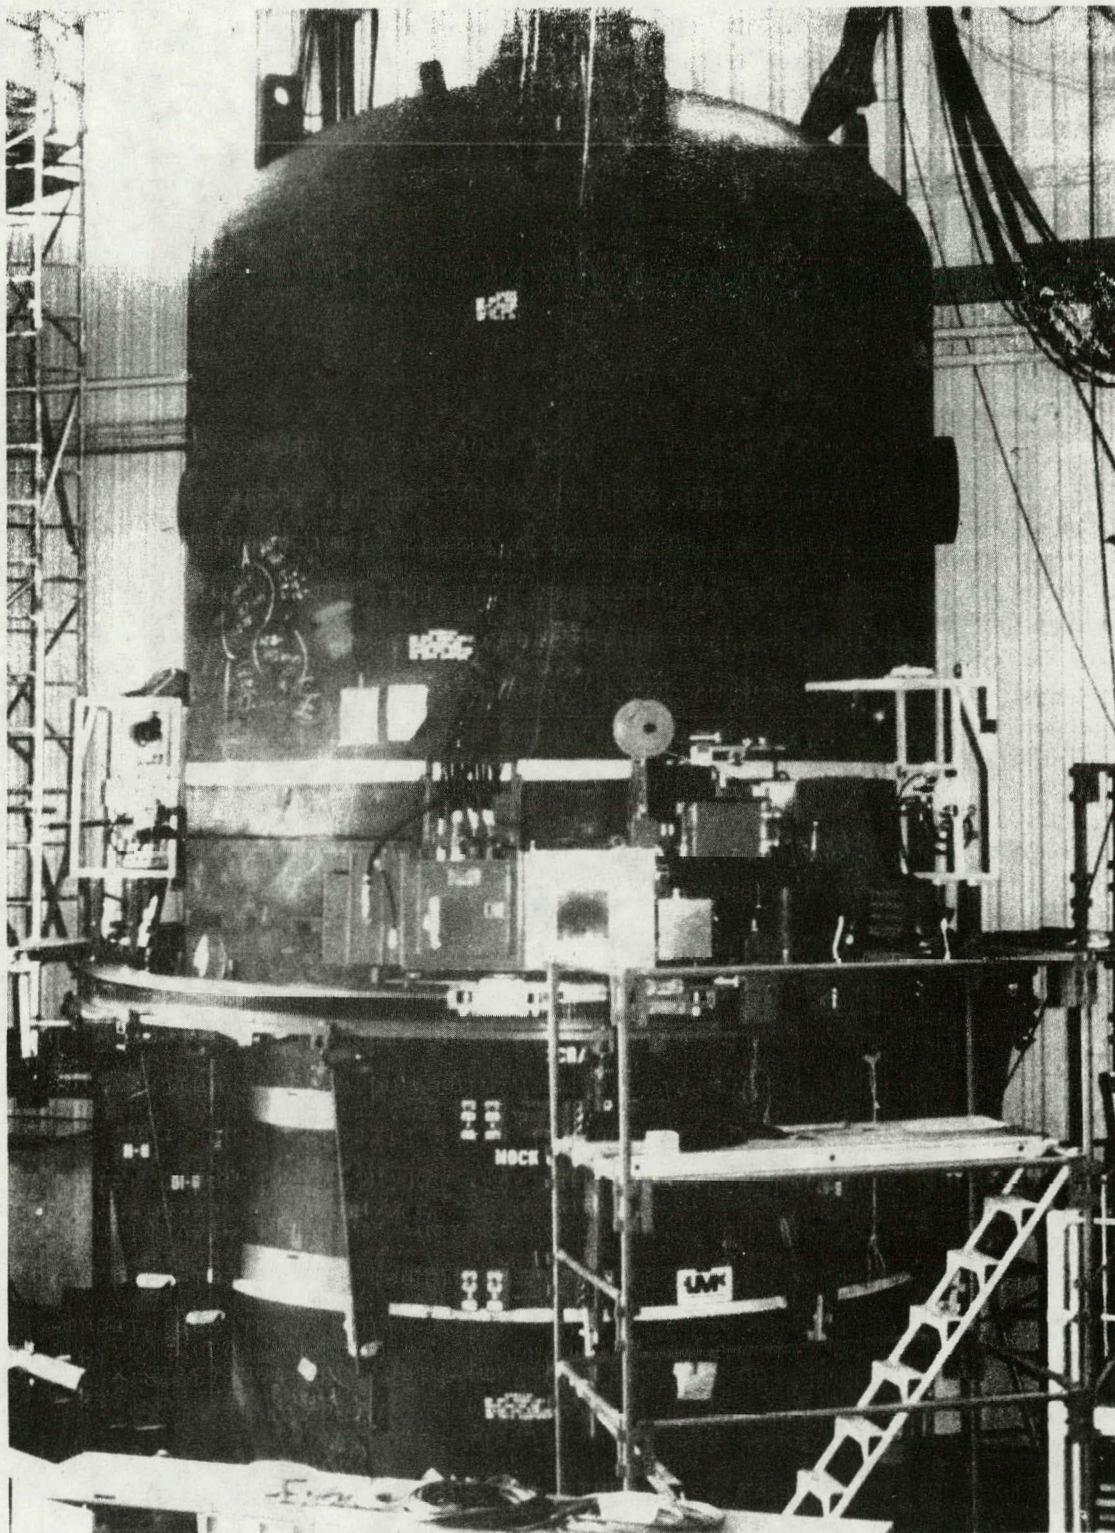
Fixturing for Dual-Machine Welding of a Horizontal Seam in a Steam Generator.
